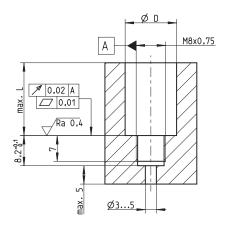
Recessed mounted Sensor. Bore ø according to mounting tool. See picture 4 and picture 5
